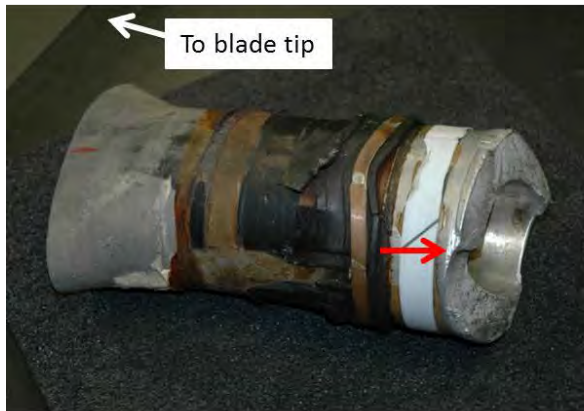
Taper and Bushing Bore Surfaces Annotated
